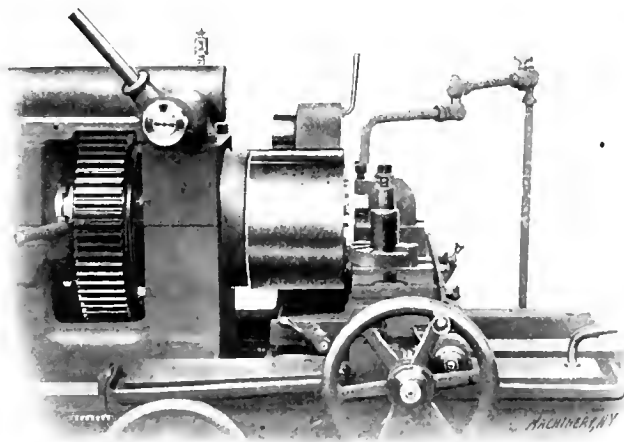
Front End of Head-stock of 4 by 48-inch Marvel Lathe, showing Chuck, and Lever for operating Chuck Mechanism
